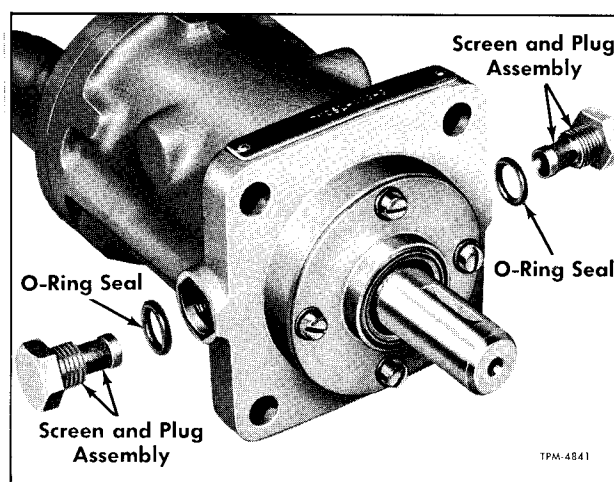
Motor Oil Strainer Plugs and Screens Removed
